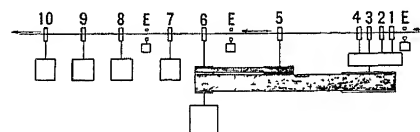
10-IN. STRIP MILL OF LACLEDE STEEL COMPANY ILLUSTRATING THE USE OF A MULTI-STAND ROUGHING MILL IN TANDEM WITH INDIVIDUAL MOTOR DRIVEN FINISHING STANDS
